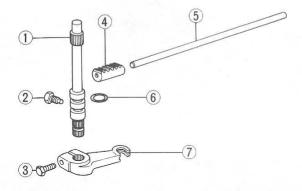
Clutch release mechanism - KLT200 A (Sec 20)
